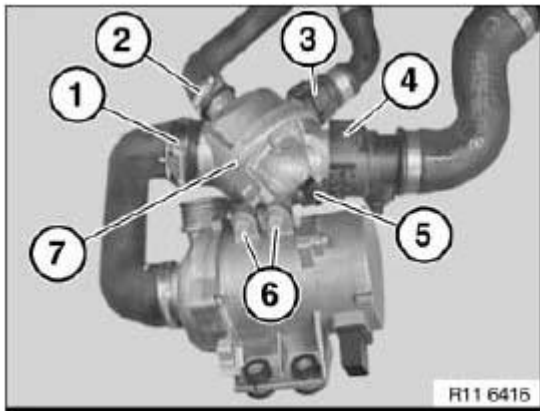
Identifying Coolant Thermostat, Hose Clamp, Screws, Plug Connection And Coolant Hose
